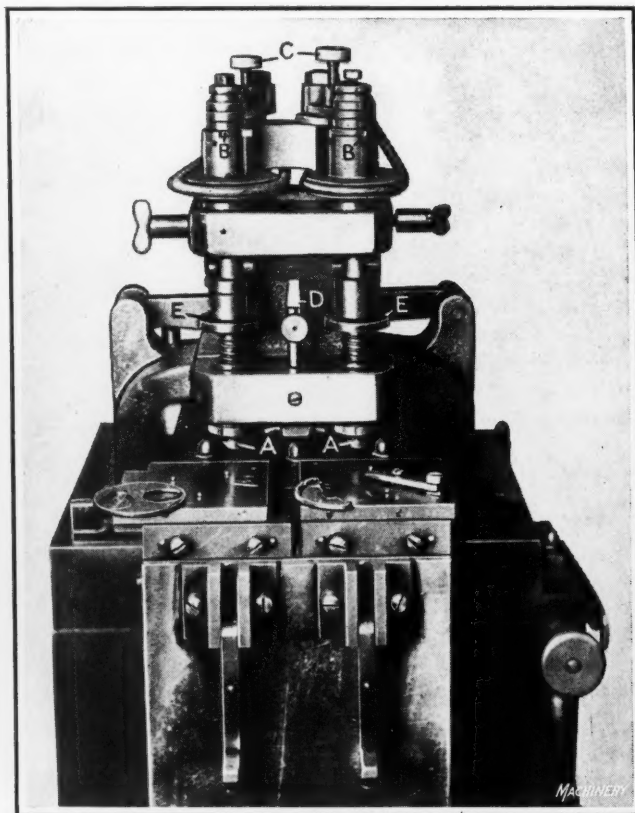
Machine for taper-turning and taper-boring Steady Pins and Holes
